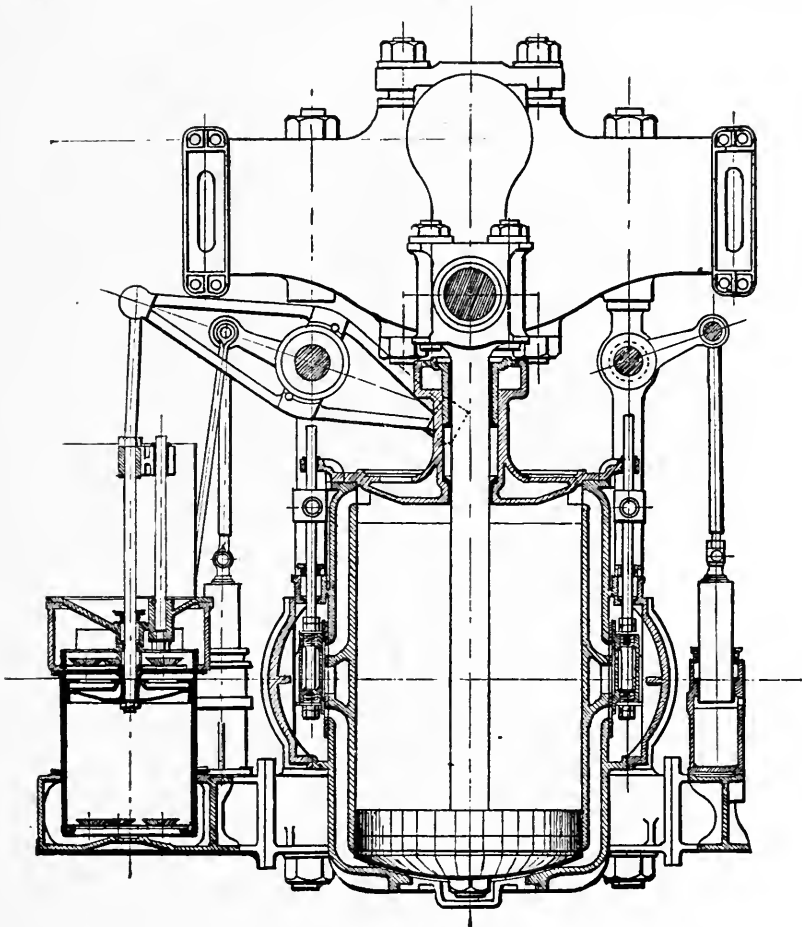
Oscillating Engine—Section through Valve-Boxes.
